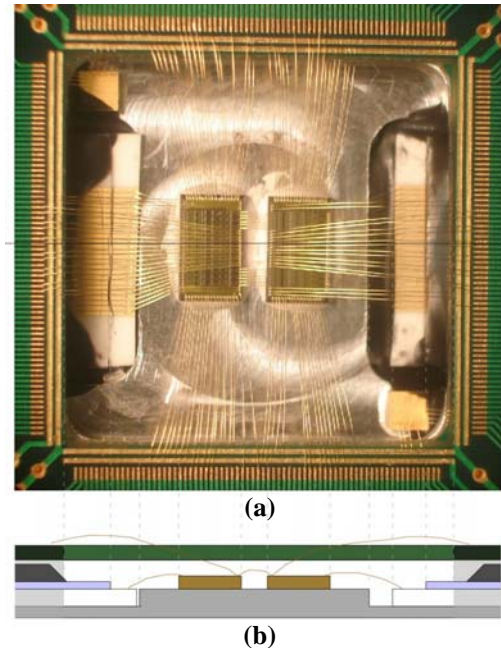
View of Cavity with wirebonds: a) top view b) cross-section
